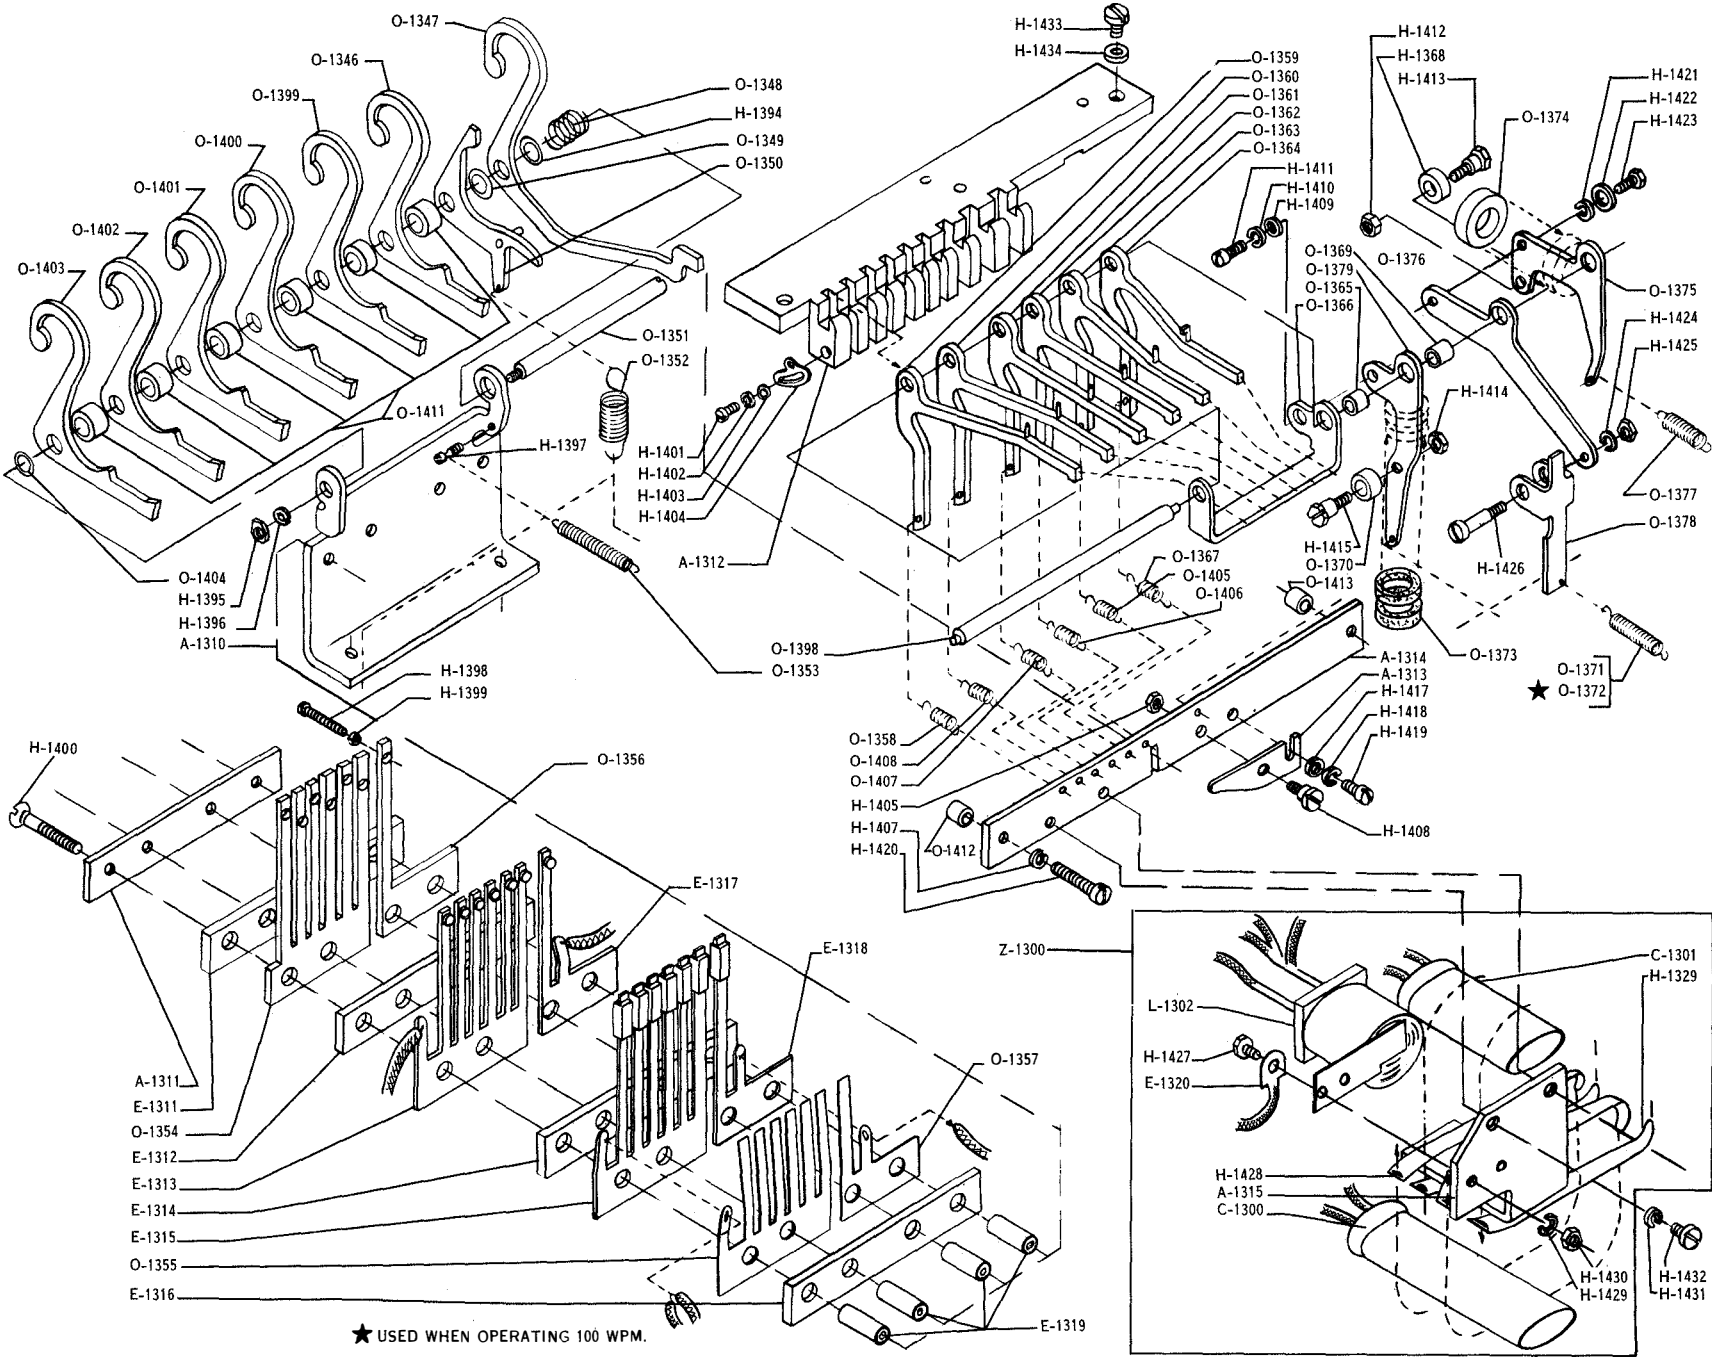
Distributor-Transmitter Clutch and Camshaft Assemblies
